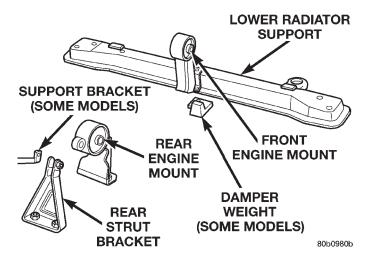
Engine Mounting—Front and Rear INSTALLATION
